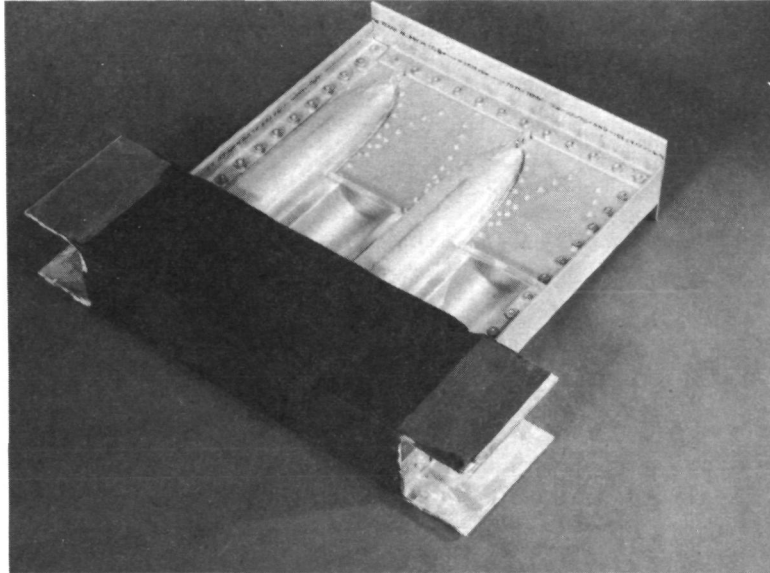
SINGLE SHEET END CLOSURE DEVELOPMENT SPECIMEN
